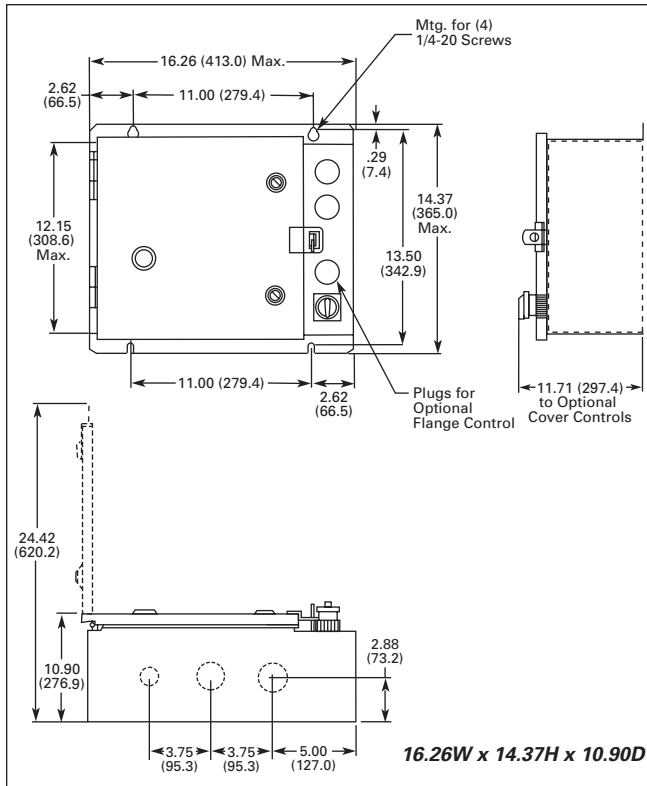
Box 7A, Type 1 — Approximate Dimensions in Inches (mm)
